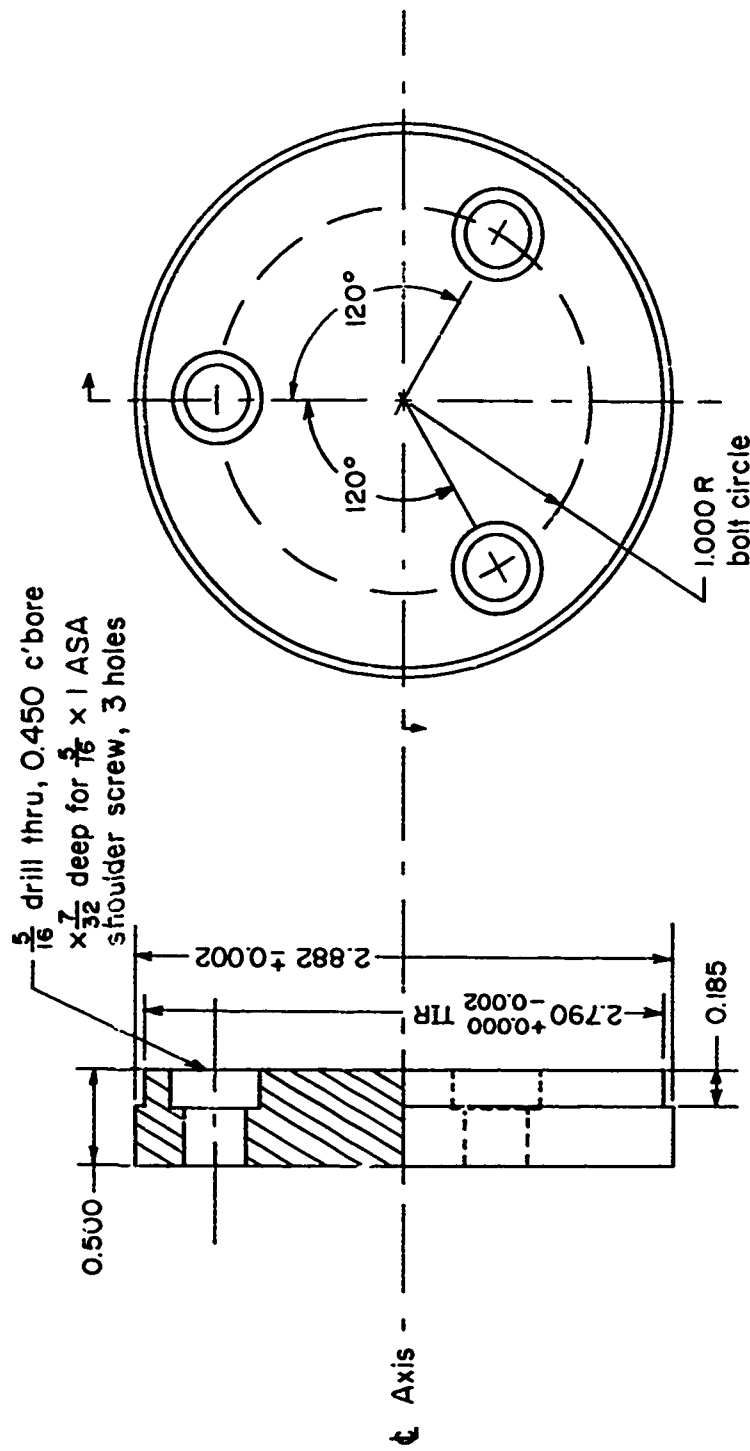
FRICTION-WELDING SPECIMEN DESIGN FOR HALF-LAP TUBULAR JOINT INNER COMPONENT
